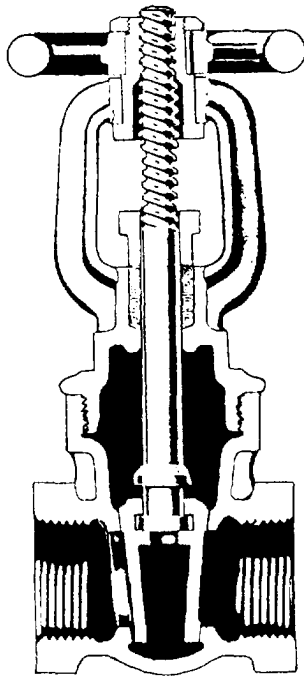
Cutaway view of a gate valve (rising-stem type).
